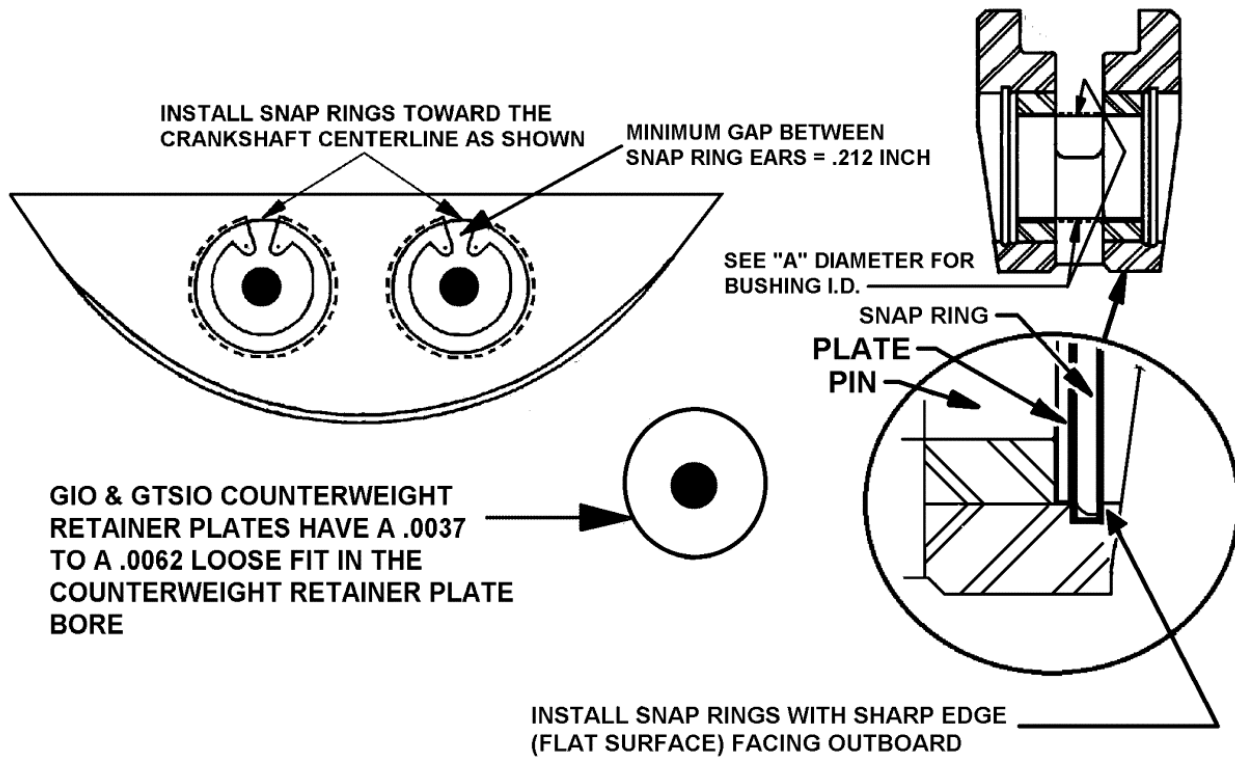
B. COUNTERWEIGHT BUSHING ASSEMBLY FOR GTSIO-520 AND GIO-550 CRANKSHAFTS
